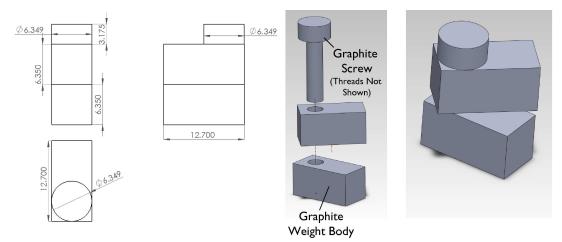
(Left)* Dimensions (in mm) for two-piece graphite weight assemblies; *(middle)* exploded view of weight assembly; *(right)* assembled weight assembly.
